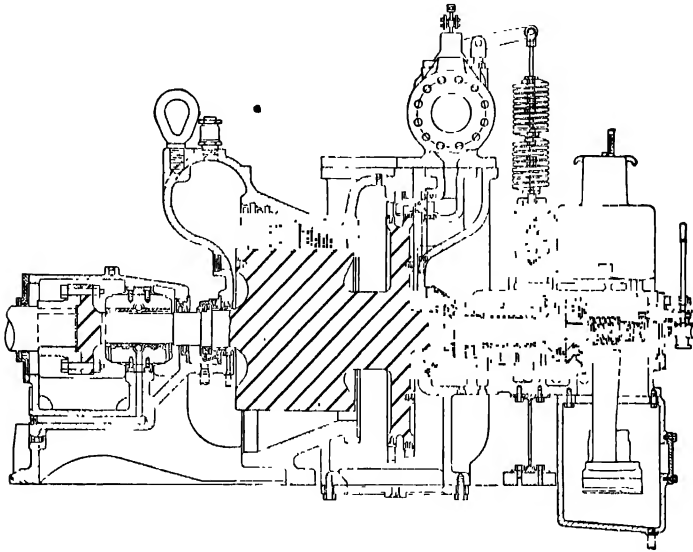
Assembly of 1500-kw. Westinghouse Impulse-reaction Turbine.
